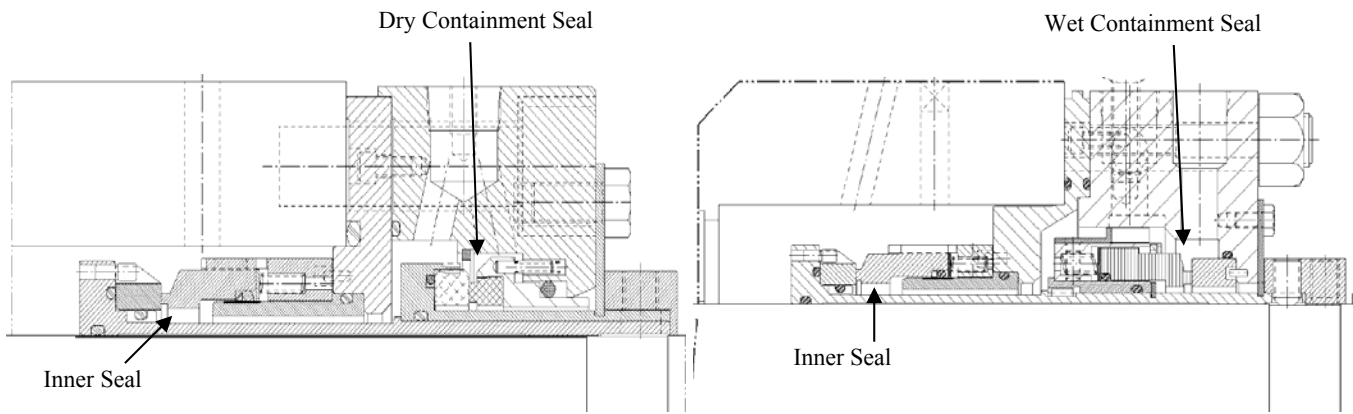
2CW-CS Type A with API Piping Plan 11/75 (left); 2CW-CW Type A with API Piping Plan 11/52 (right)
